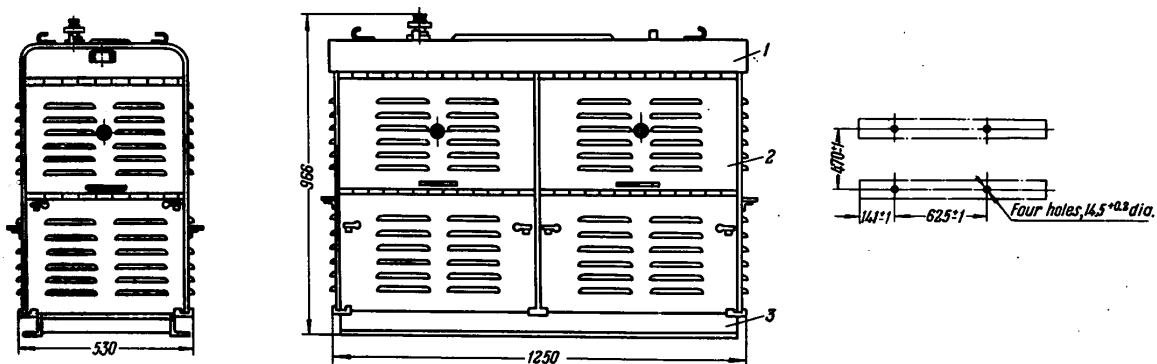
ЖЗС-4М Power Station with Roof and Bonnet
